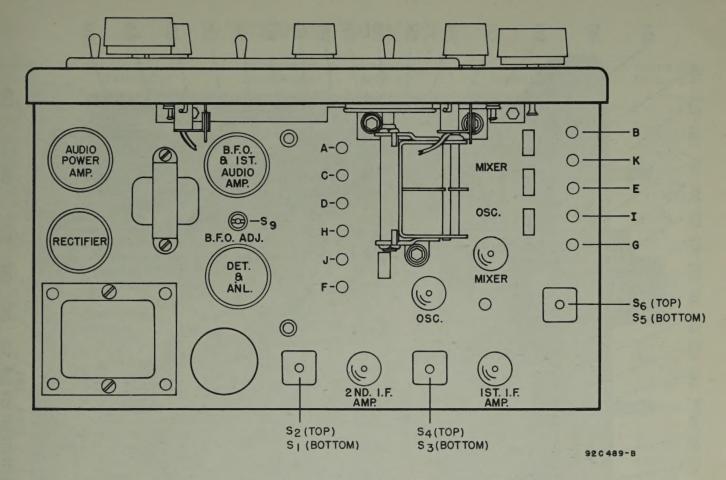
Top View of Chassis Showing Location of Alignment Adjustments
